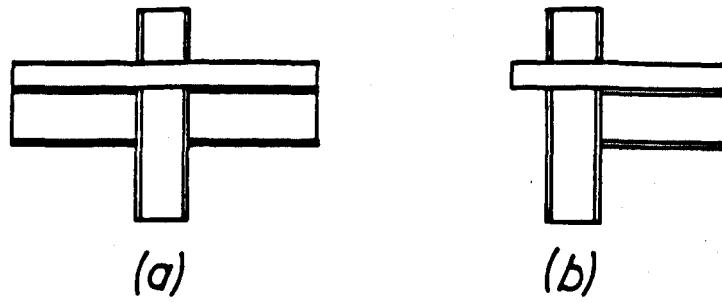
, (a)Cruciform specimen, and (b)cantilever specimen
